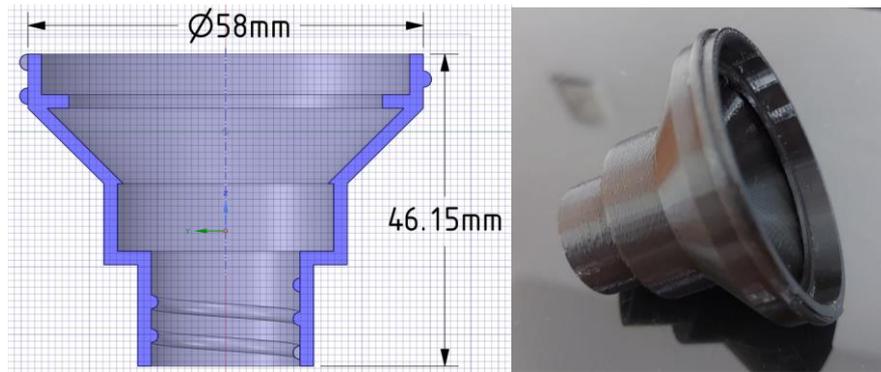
Frontal adapter version V2. On the left is the design of the frontal adapter and on the right is the printed piece. The photograph is in scale with the model.
